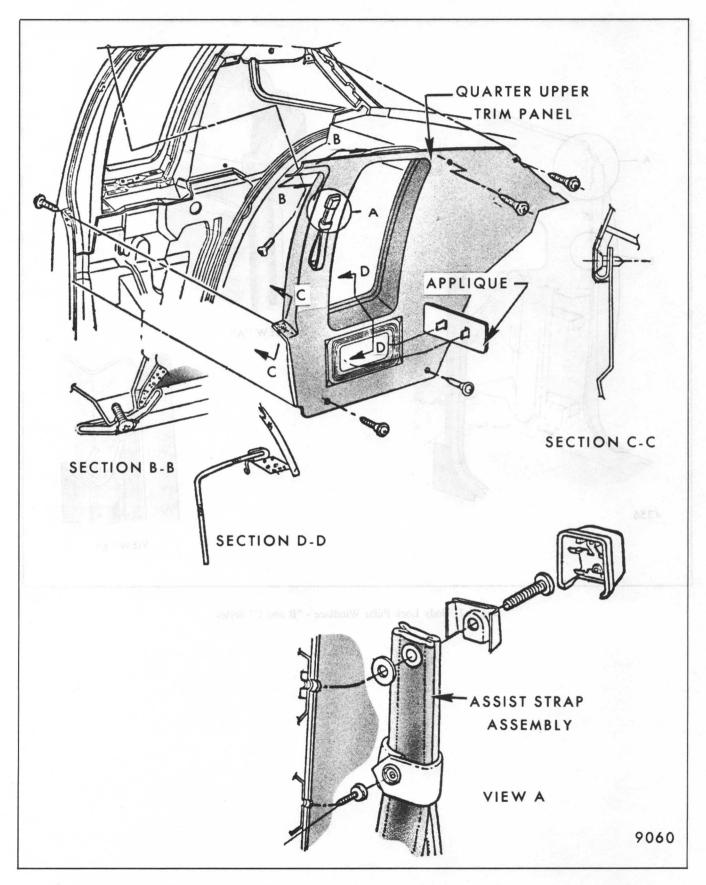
Quarter Upper Trim Attachment - Oldsmobile "E-57" Styles
